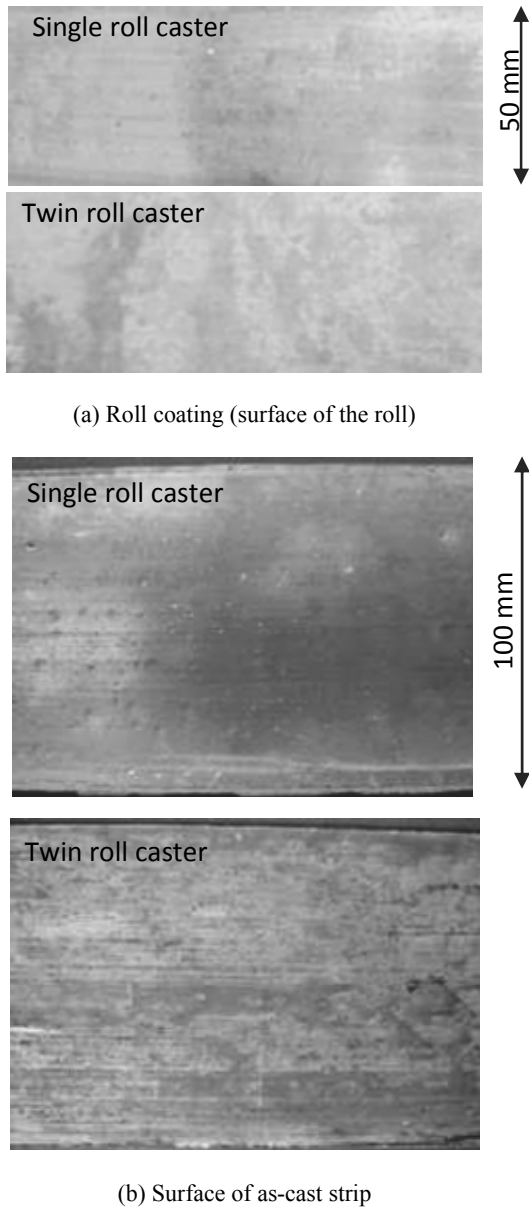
Roll coating and strip surface of the single roll caster and twin roll caster
